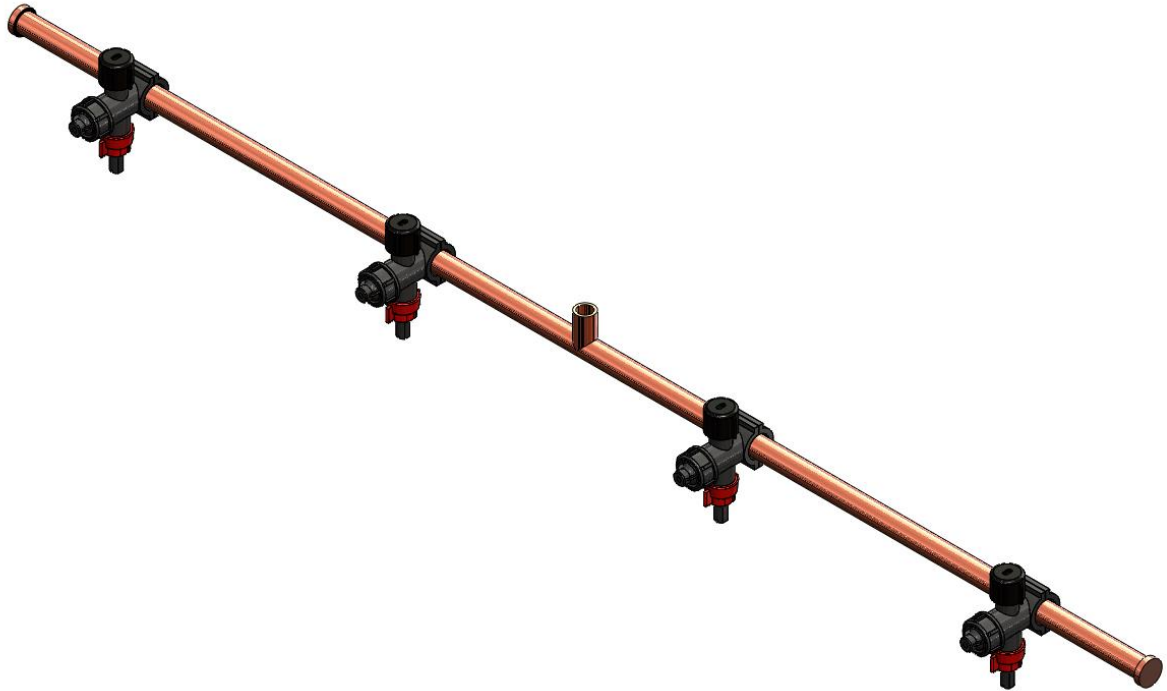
Spray boom, 54 inches, four nozzles 15 inches apart.
